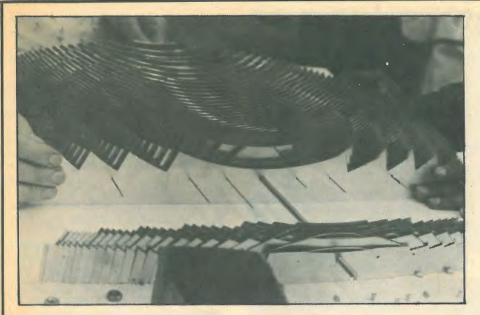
Assembling the aluminium strips on high tensile wires, with spacers threaded on the wires to form the waveguide between strips.
